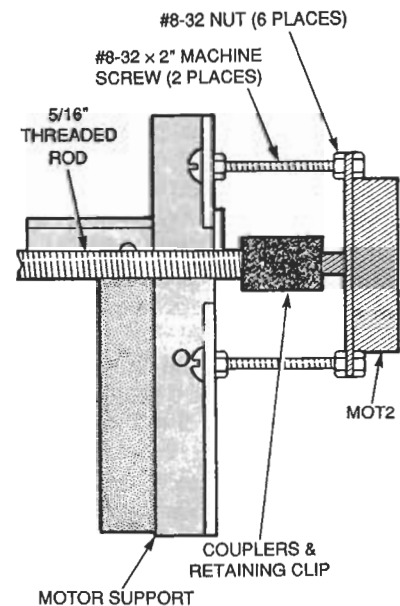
As shown here, stepper motor MOT2 mounts against the motor support bracket.
